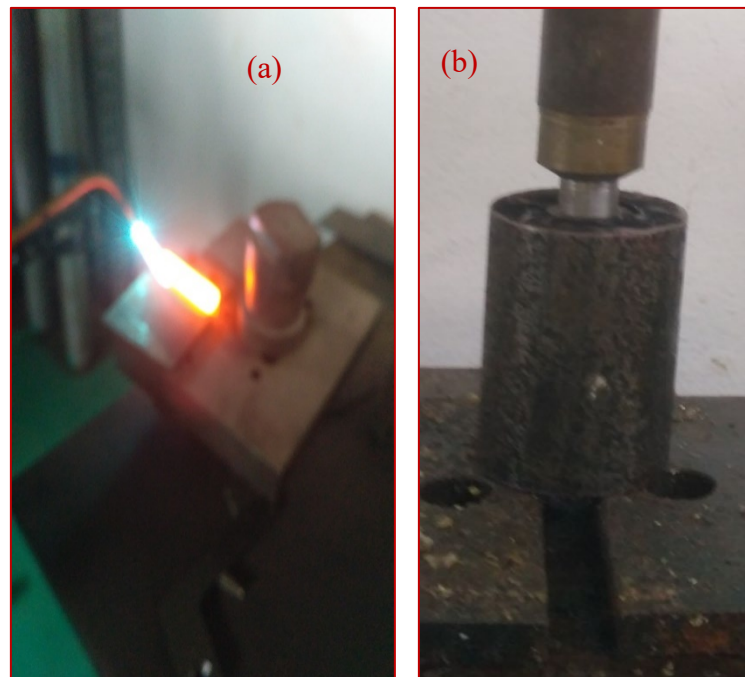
14 shows extrusion making process of (a) heating (b) pressing in the die
